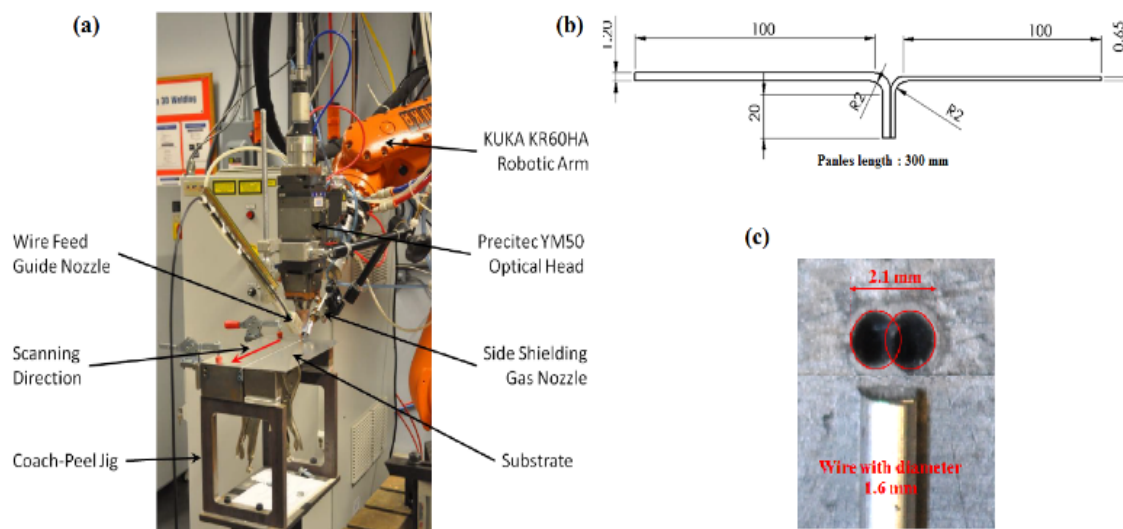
(a) Schematic view of experimental setup, (b) dimensions of coupons c) dimension of dual laser beam
